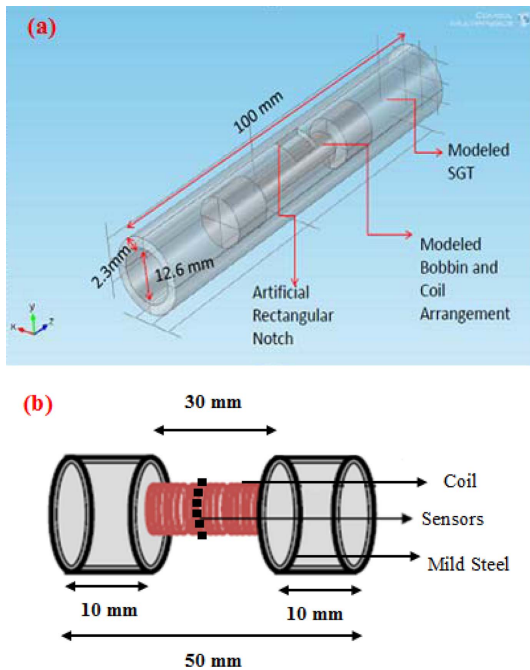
(Color online) (a) 3D geometry of tube and bobbin coil arrangement (b) dimension of the bobbin coil.
